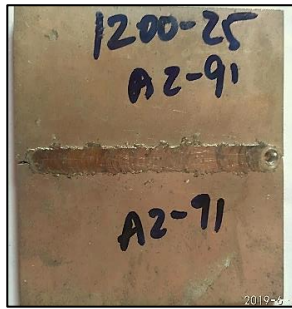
The weld made at 1200rpm at 25 tool traverse speed with similar welding Az91 alloy
